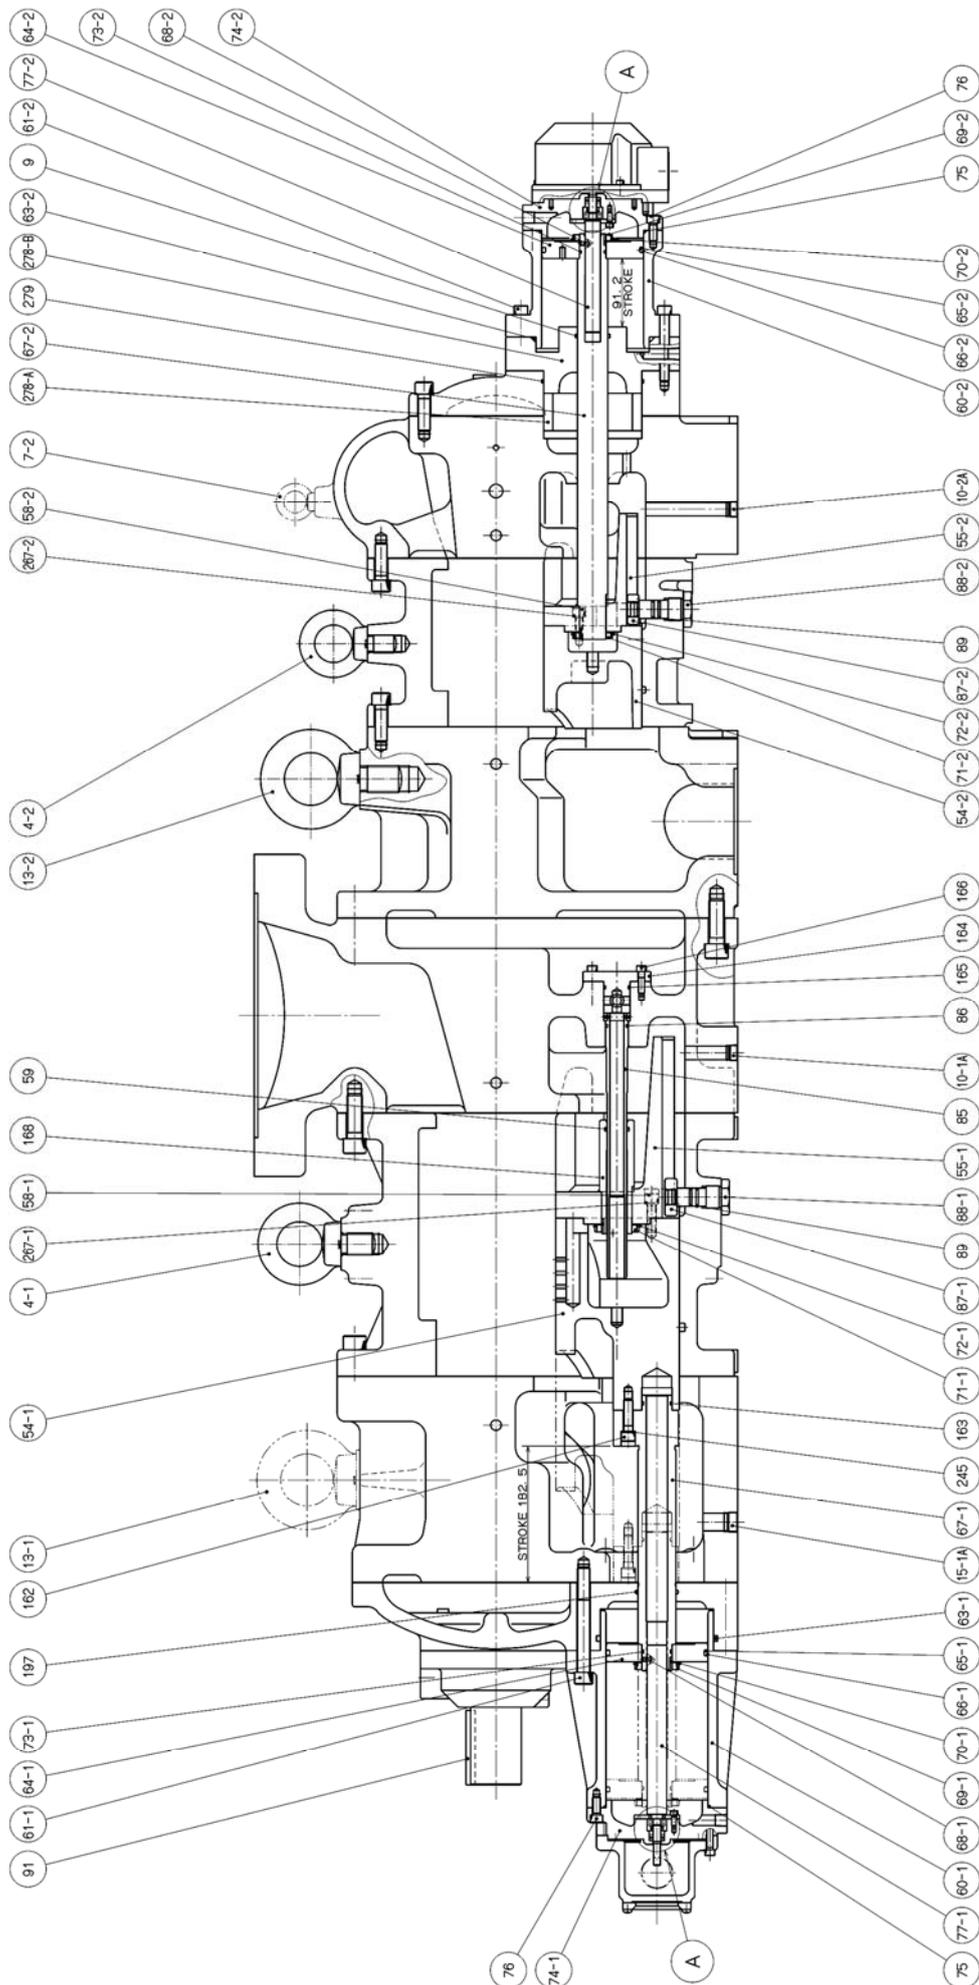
2520MSC Assembly Sectional View (Vertical)
